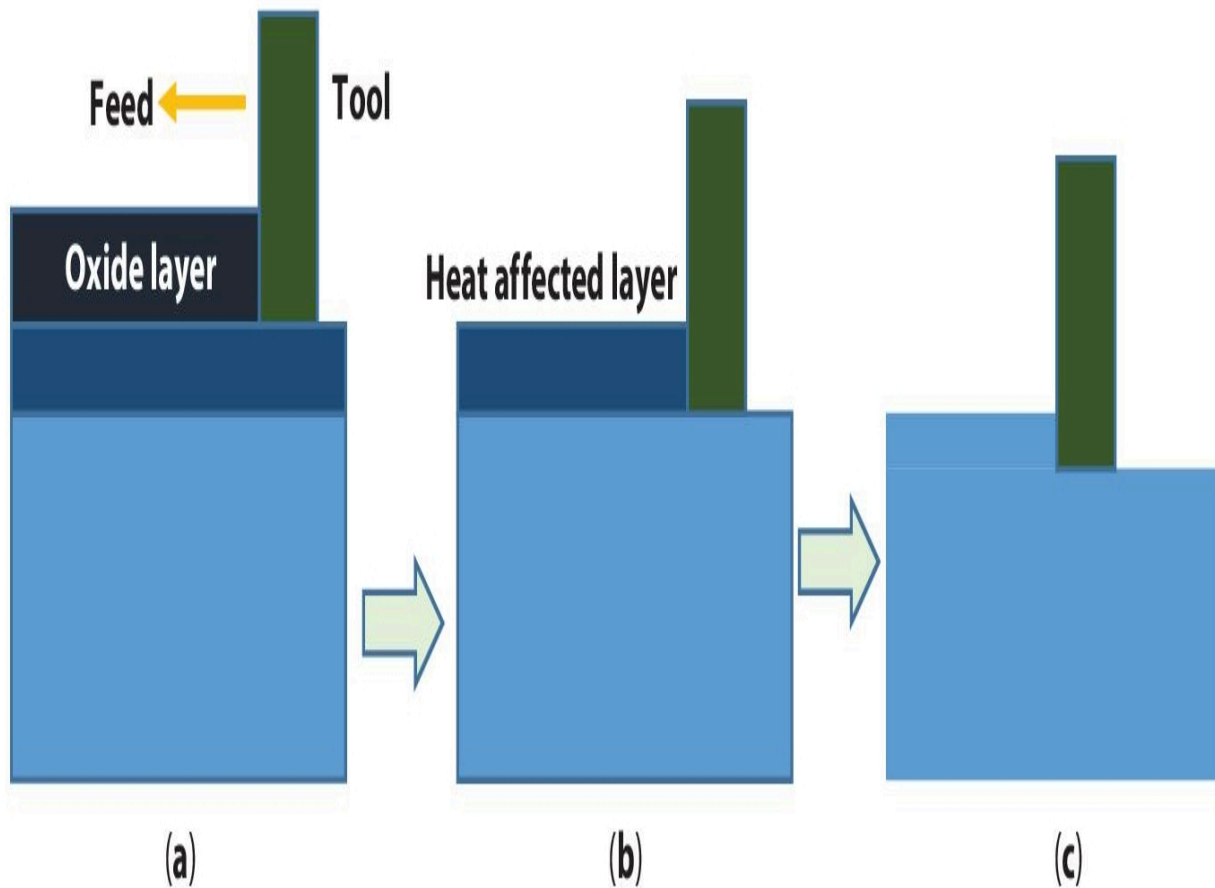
The Illustration of material removal procedure. (a) Removal of oxide layer, (b) removal of heat-affected layer removal, (c) Removal of base material layer removal.
